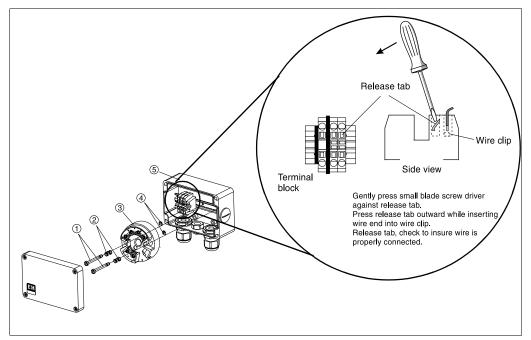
Mounting the temperature transmitter, depicted here with terminal housing
